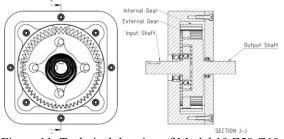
Technical drawing of Model 10 Z58-Z60 20° harmonic reducer
